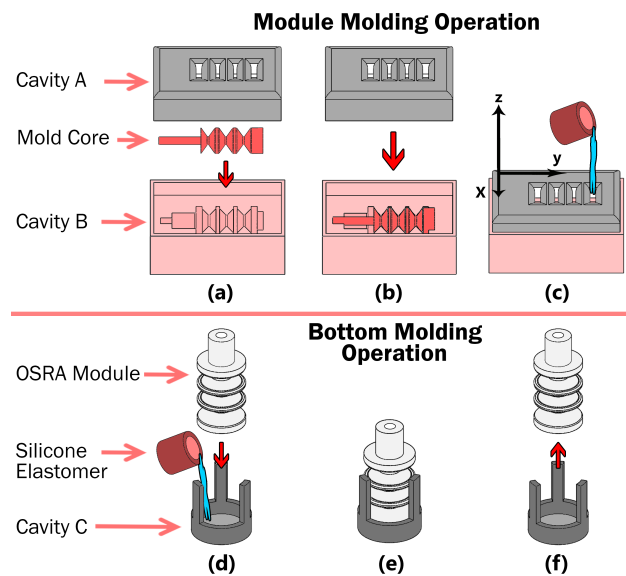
The molding process for creating a single module is illustrated. (a) The three piece mold is assembled, (b) the mold core is inserted, and (c) silicone is poured into the assembled mold. The OSRA module is then removed from cavities. (d) The module is then inserted into a separate pre-filled mold (Cavity C) to seal the bottom. (e) The module is cured and (f) finally removed. Each mold is depicted here with a different color/shade.
